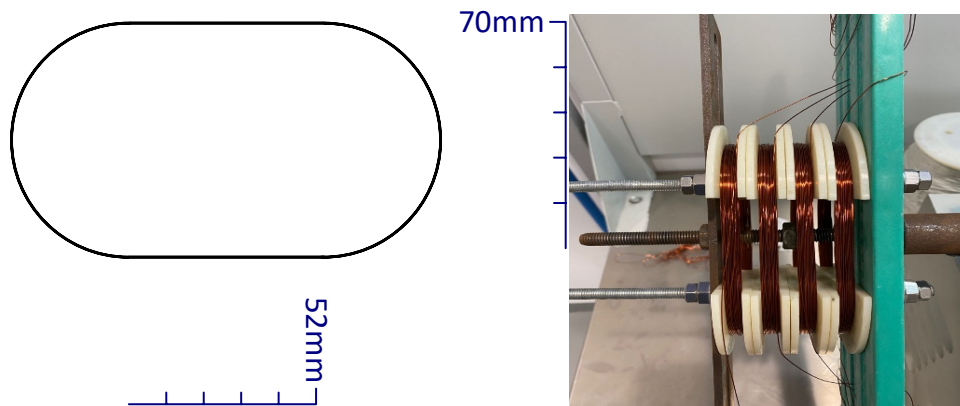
Dimension scheme of copper winding (left) and photo of winding machine manufacturing process (right)
